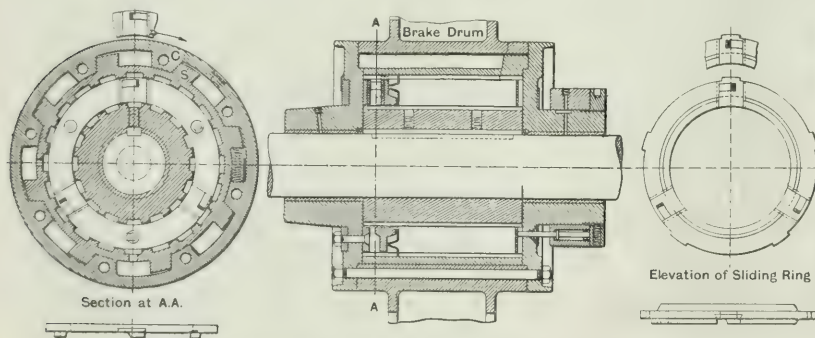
SLIPPING BRAKE BY THE HELE-SHAW CLUTCH COMPANY.
